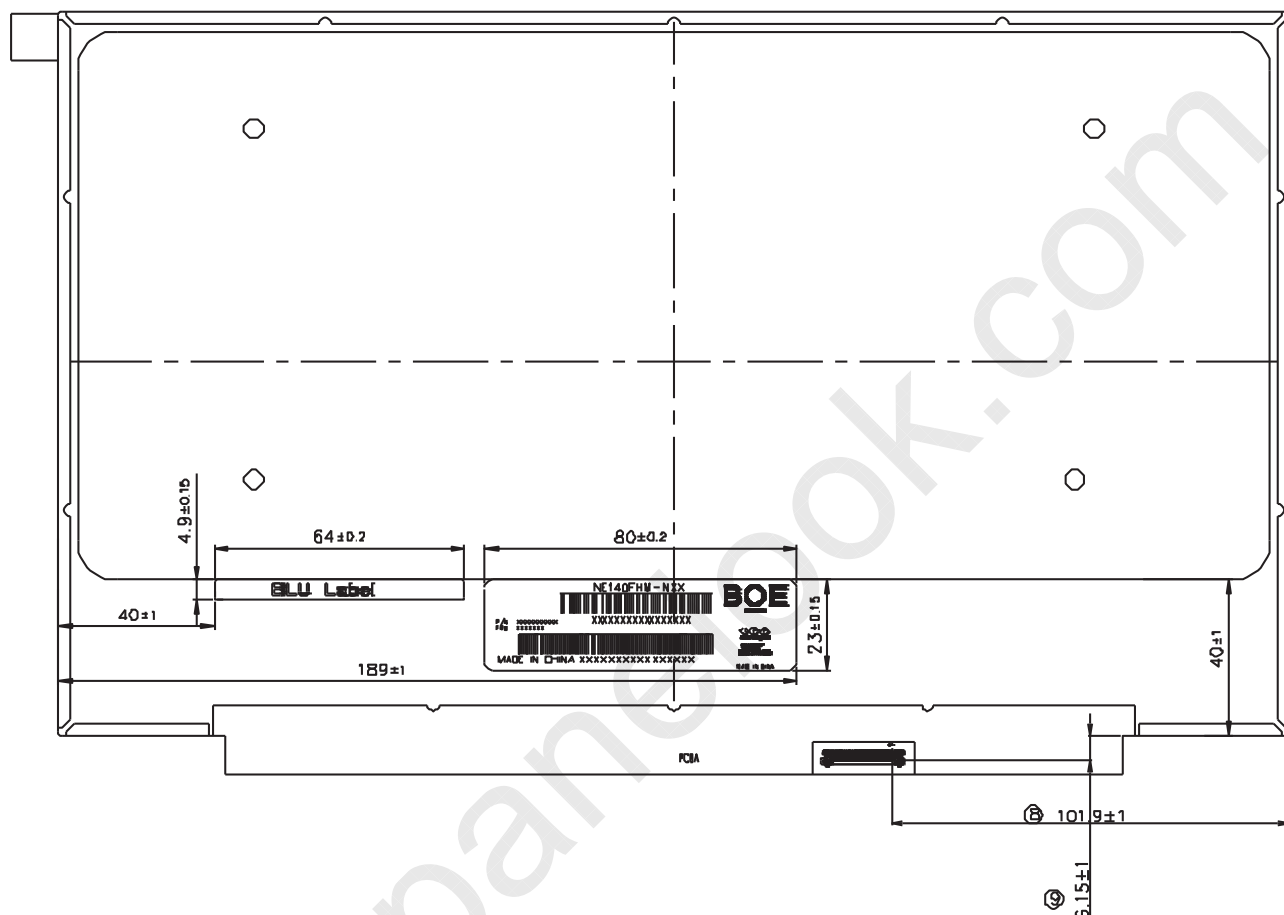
TFT-LCD Module Outline Dimensions (Rear view)
